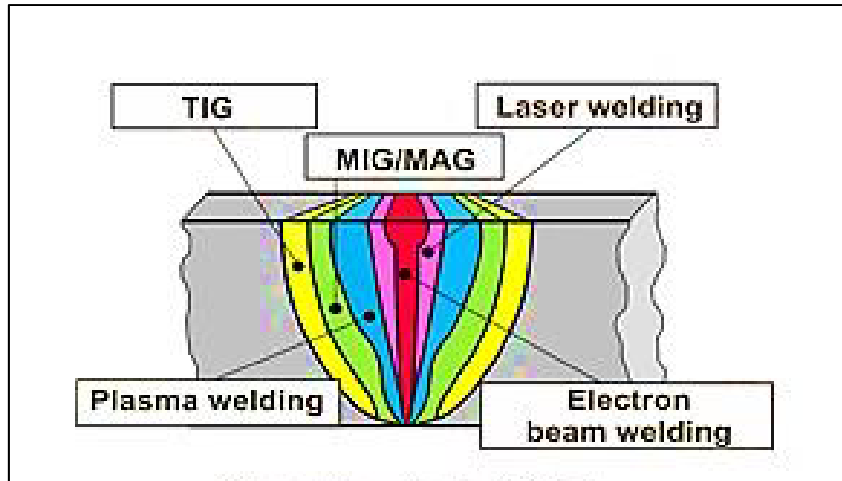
Schematic of butt joint geometry in different arc welding processes (Pilarczyk et Węglowski, 2014)
